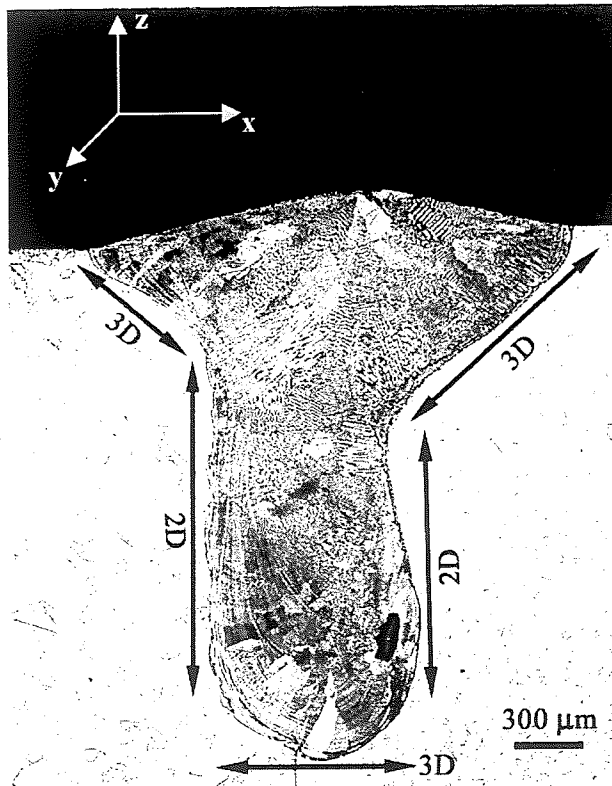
Typical dissimilar metal laser weld with Ni200 base metal on the left. The weld pool shape is a combination of 3D and 2D heat flow conditions. Y direction is out of the page.
